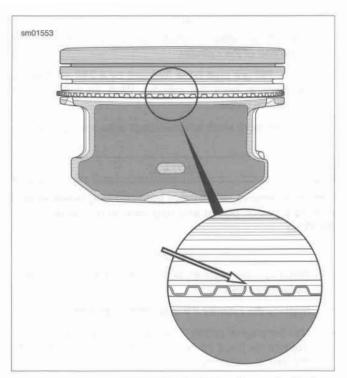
Installing Oil Control Ring Expander Spring (typical)
